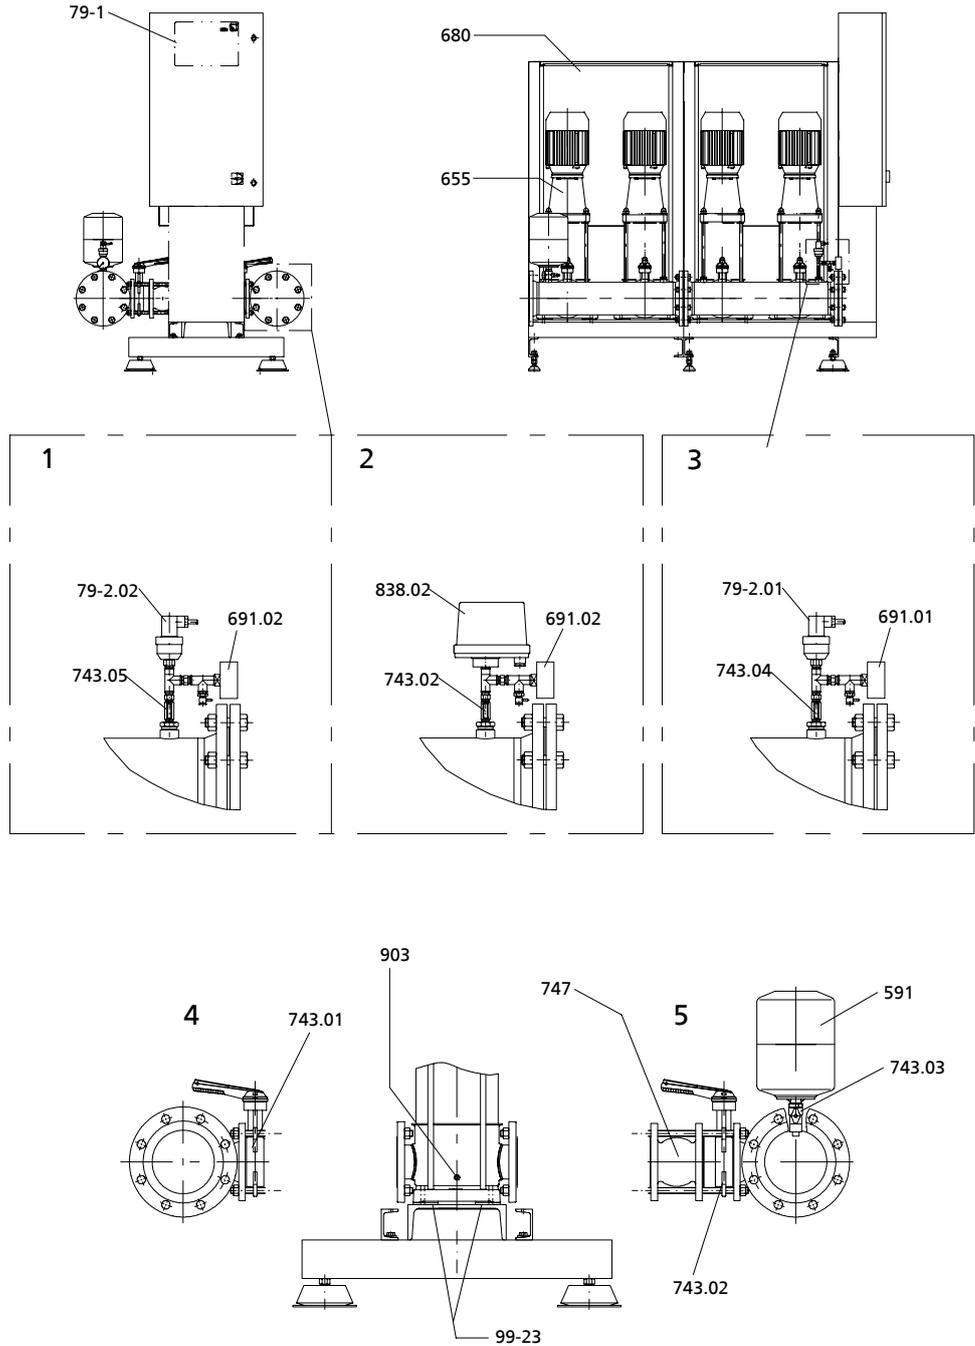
General assembly drawing of Hyamat K with Movitec 25, 40, 60, 90 1952:1008
